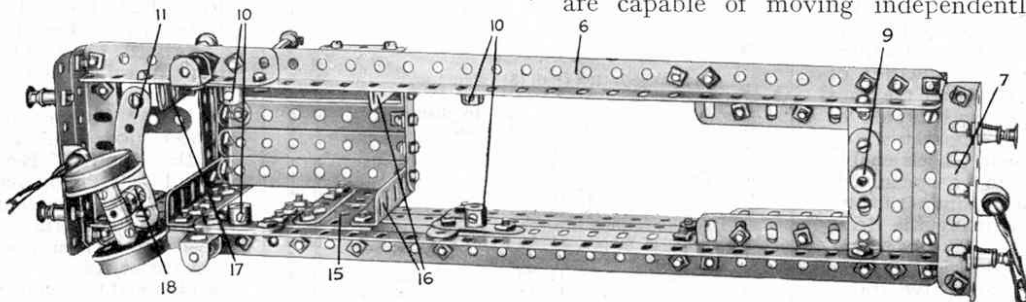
Underneath view of Main Frames, with rear pony truck and cab in position
